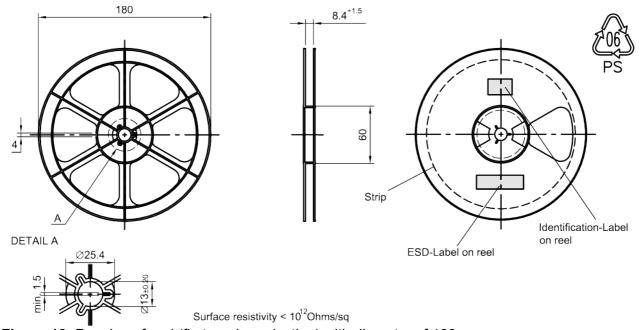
Drawing of reel (first-angle projection) with diameter of 180 mm.
